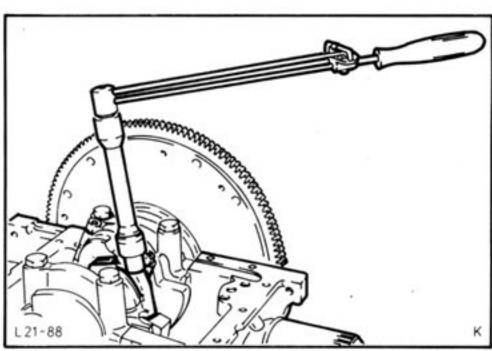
Torque connecting rod bolts as specified in Technical Data.
